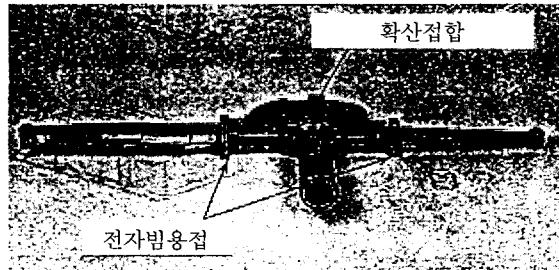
Appearance of part applied diffusion bonding and electron beam welding
